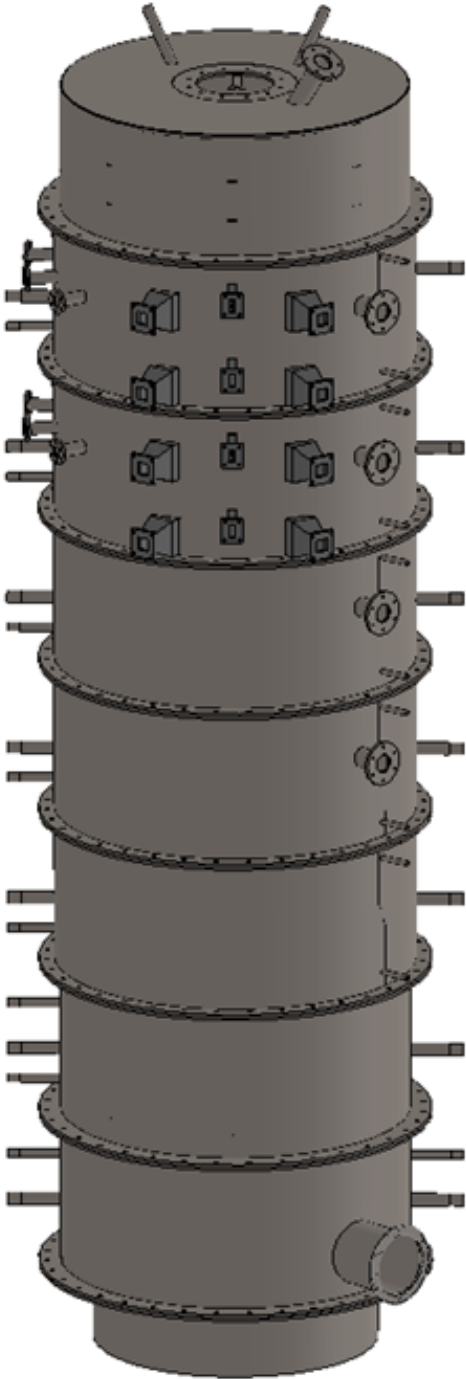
A CAD drawing of the geometry of the PACT Combustion Furnace [176].
